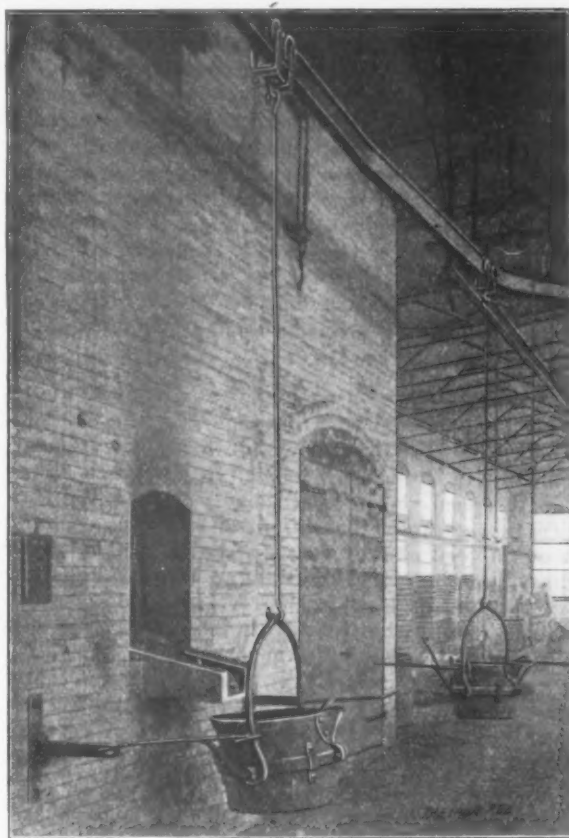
A Bridgeport Foundry. Bringing Ladles to the Cupola.
